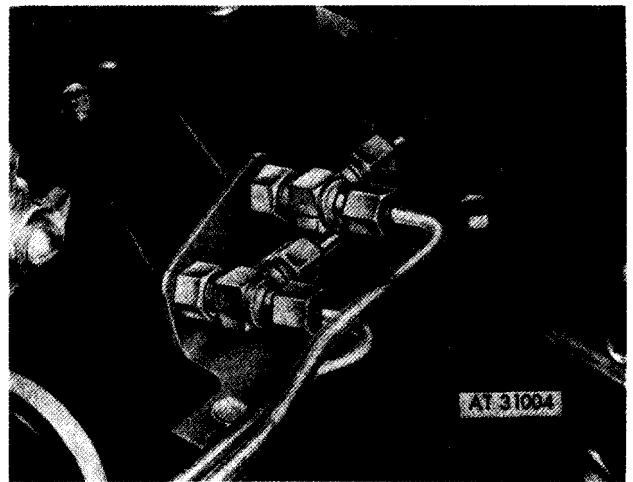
Oil level indicator tube upper cover plate-relocated oil filler tube installed view.
